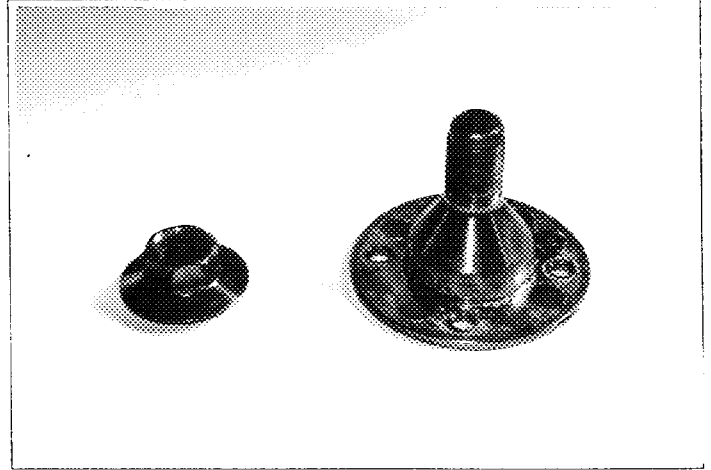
CENTRAL WHEEL BOLTING SYSTEM,
